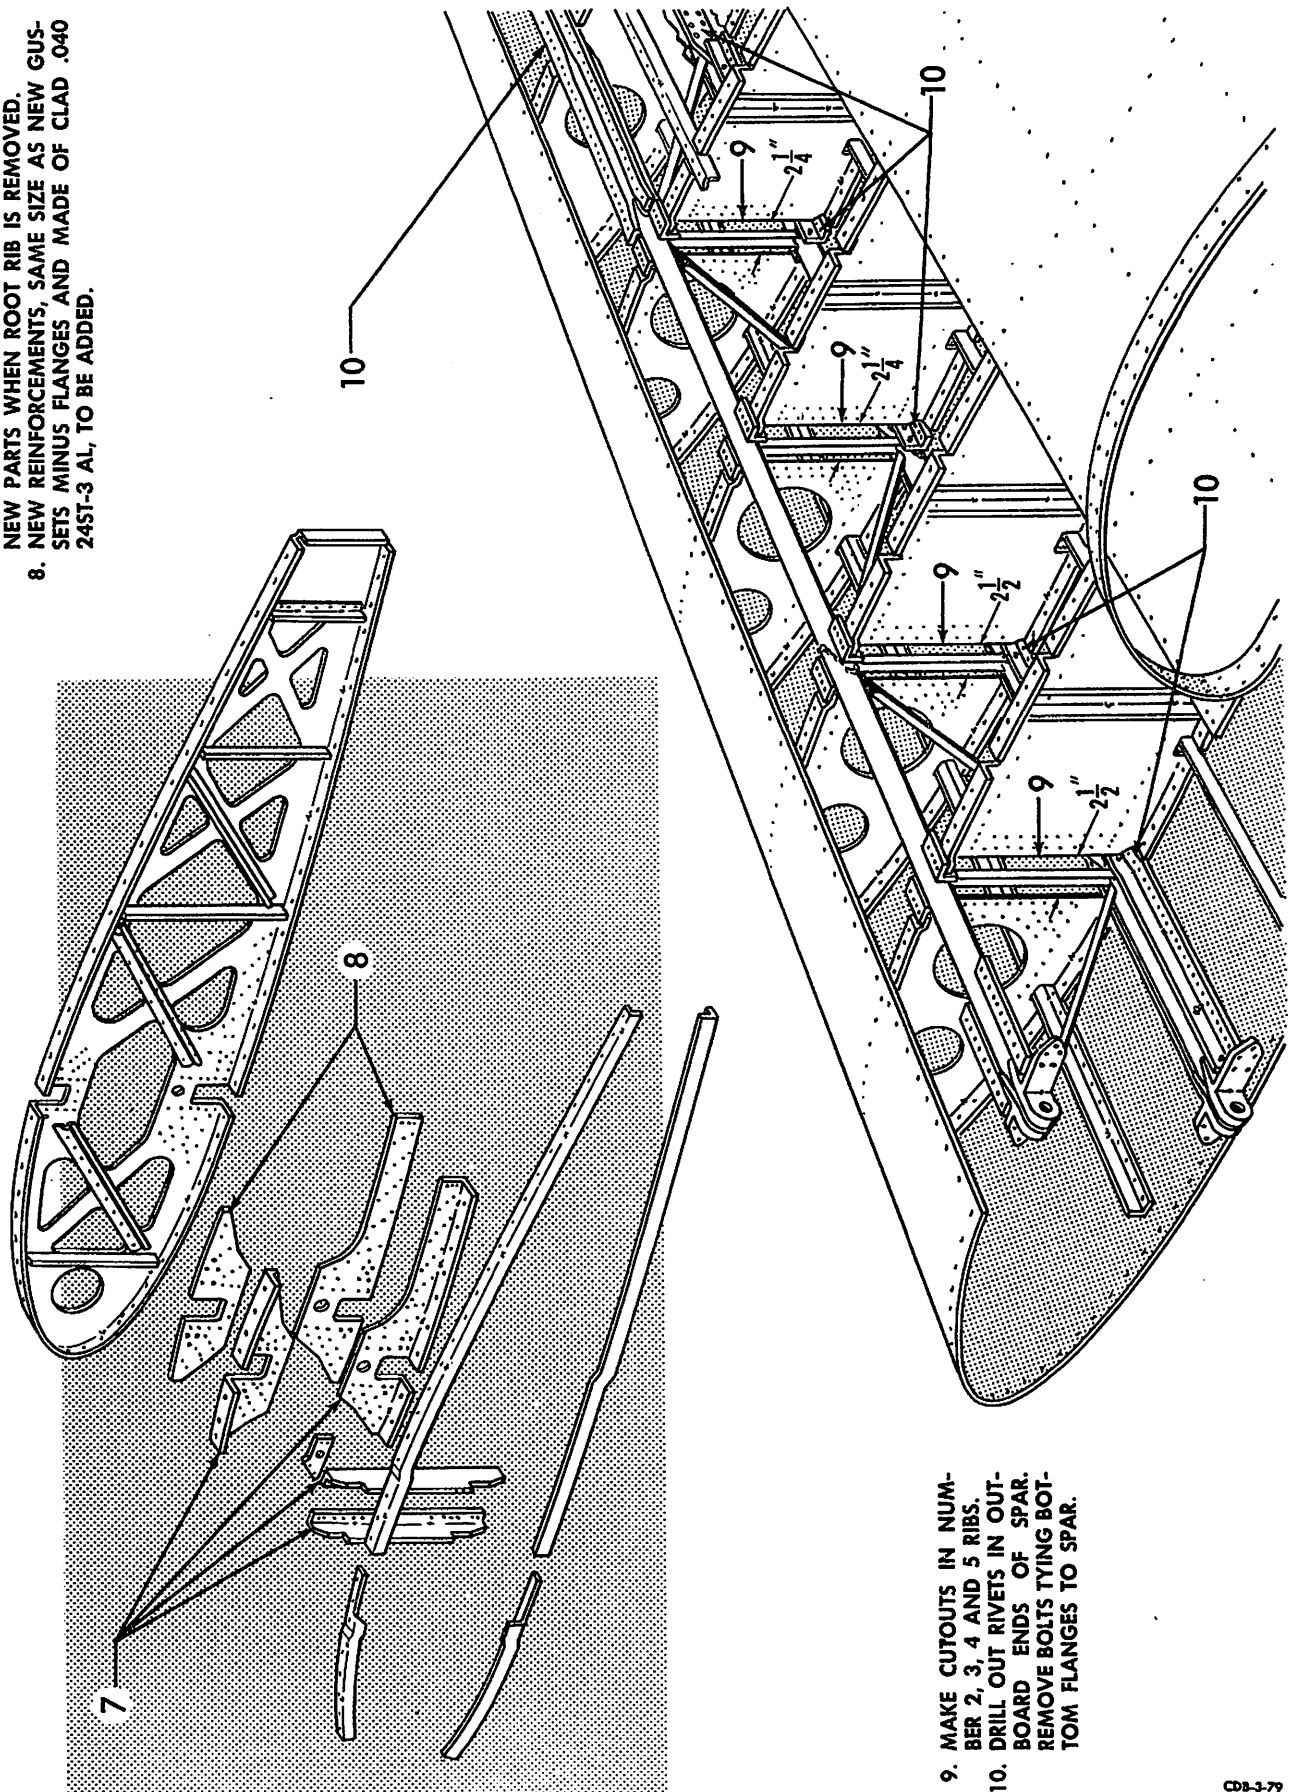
A. Outer Wing Panel Front Spar Replacement (Sheet 2 of 6 Sheets)
